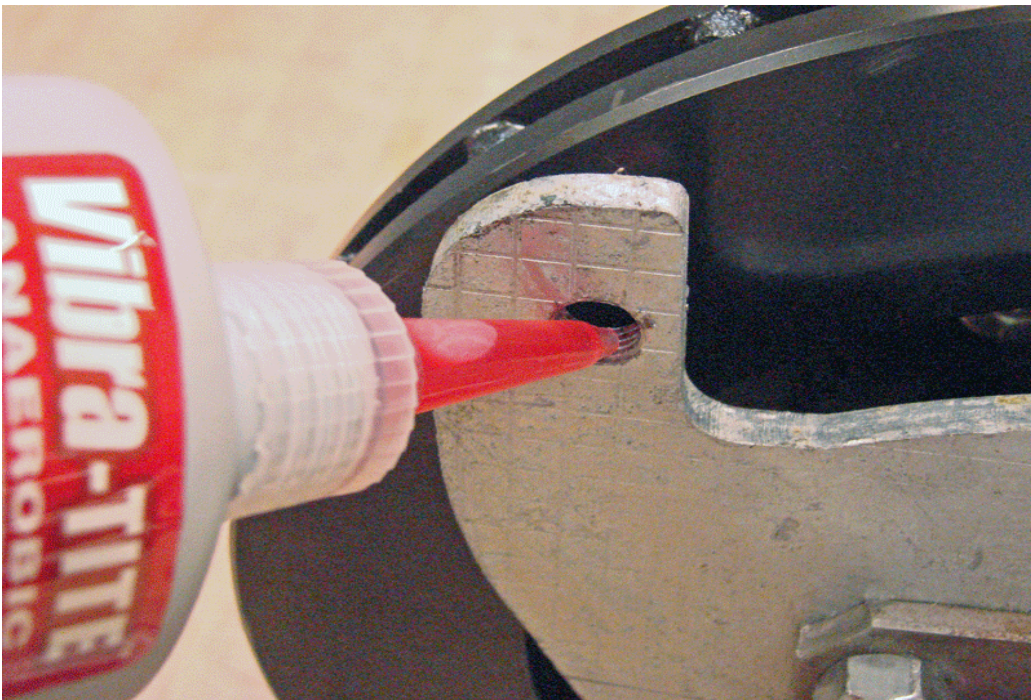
Apply Red Thread Locker to the Female Threaded Hole In Caliper Mounting Bracket.
